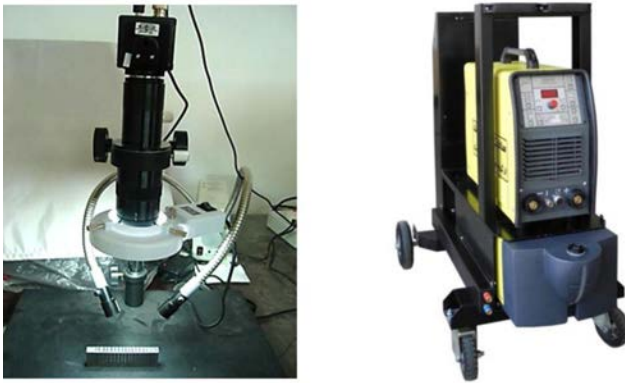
Optical microscope and TIG welding machine used.
